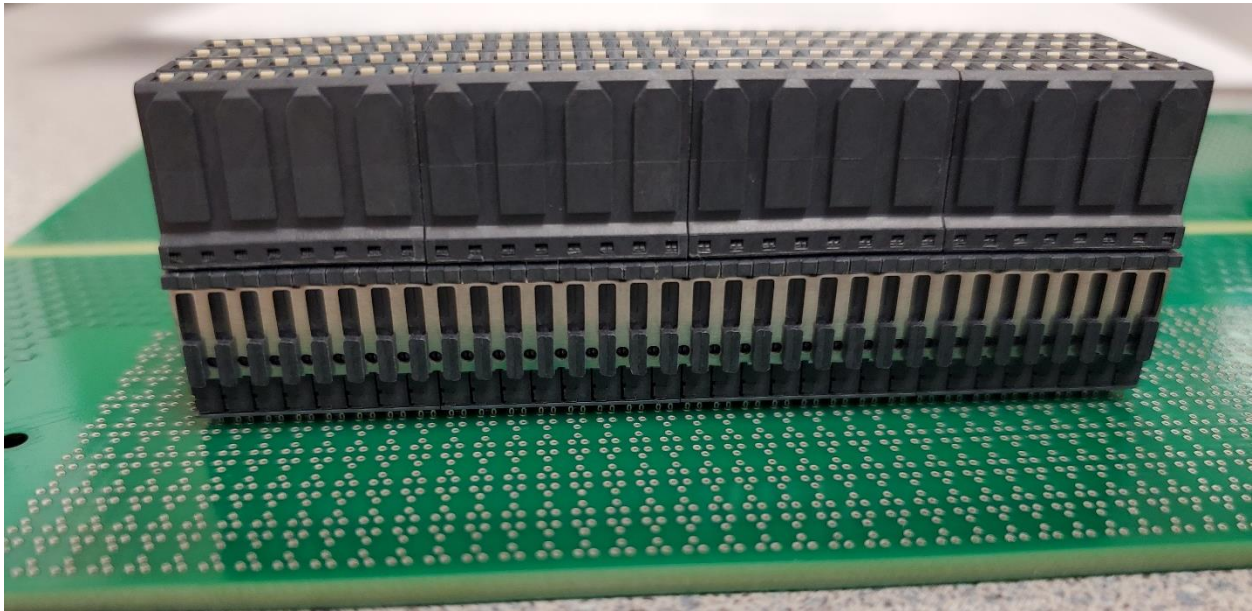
Pre-loaded view of the assembly. Check for bent pins.
